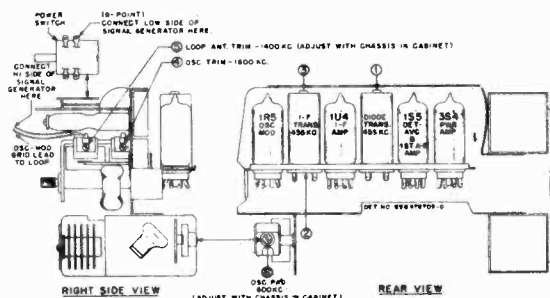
CHASSIS HS-62 TUBE & TRIMMER LOCATIONS
